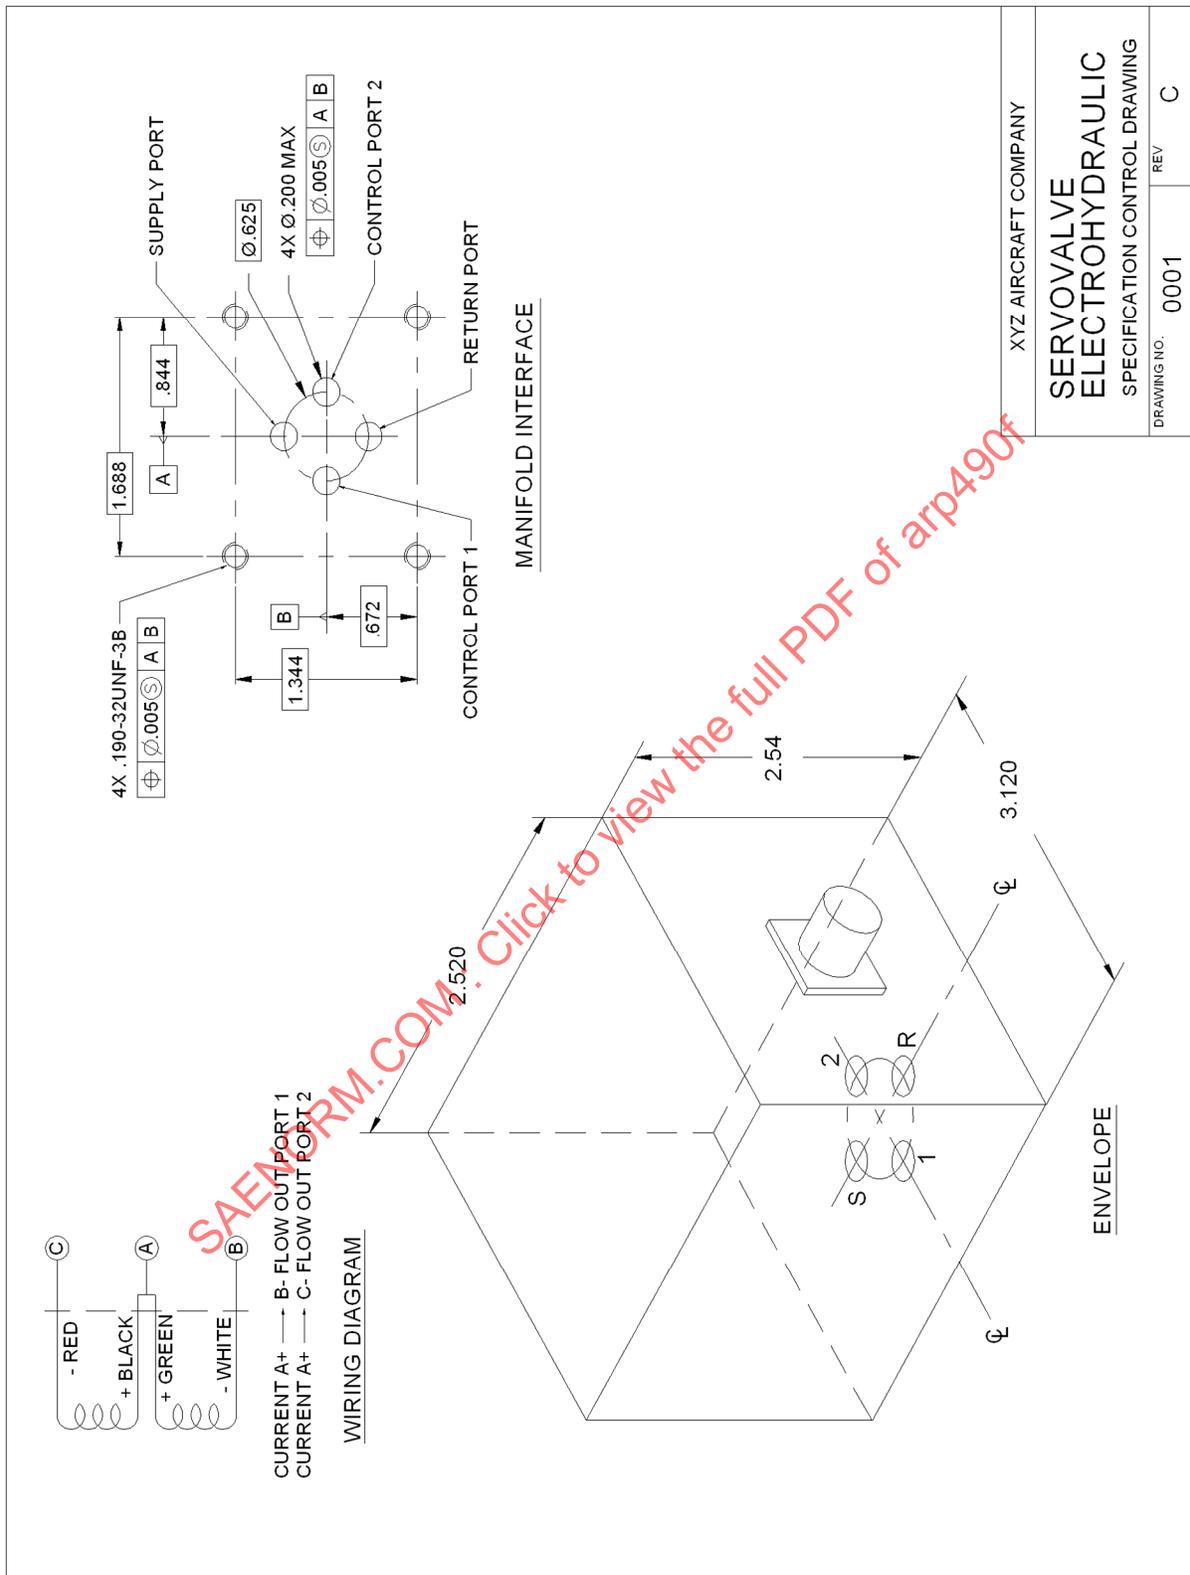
SPECIFICATION CONTROL DRAWING
